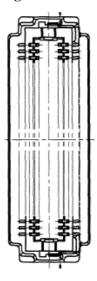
HRS DF12(3.0)-60DP-0.5V(86) mating header on the user board
